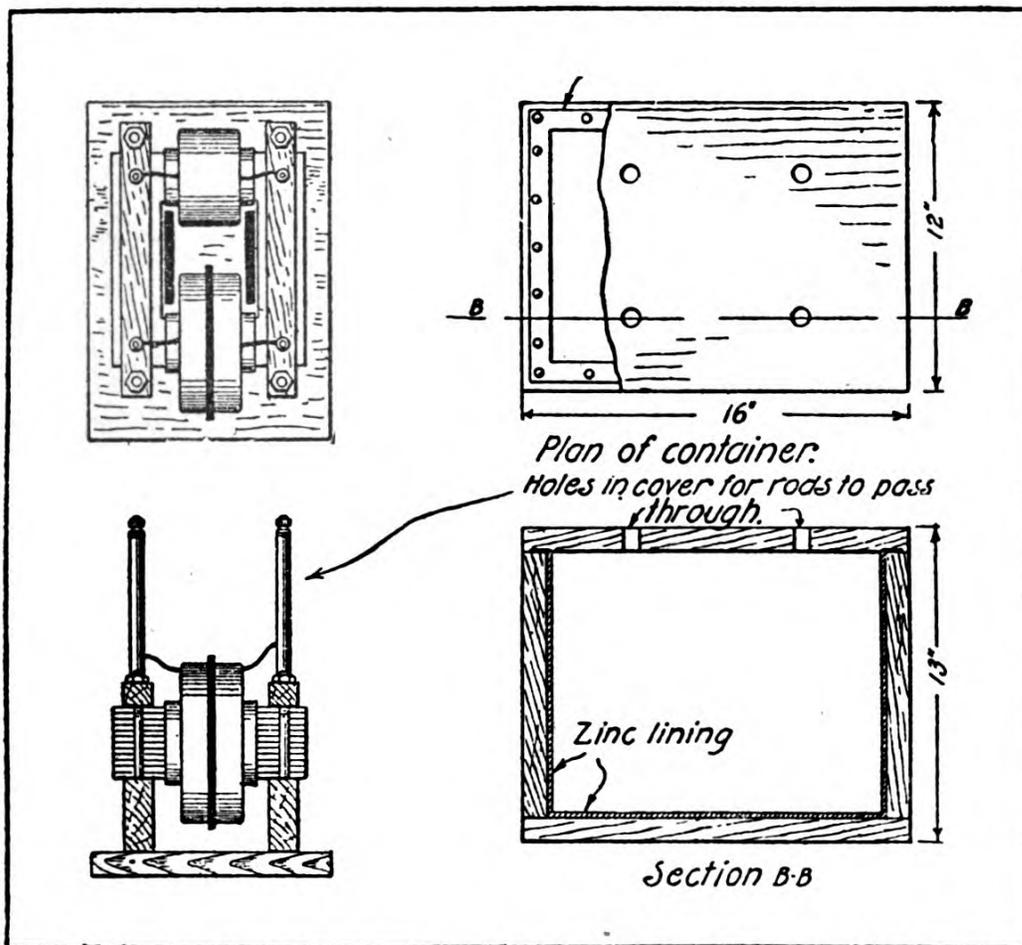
to 98 inclusive—Details of the magnetic leakage transformer
